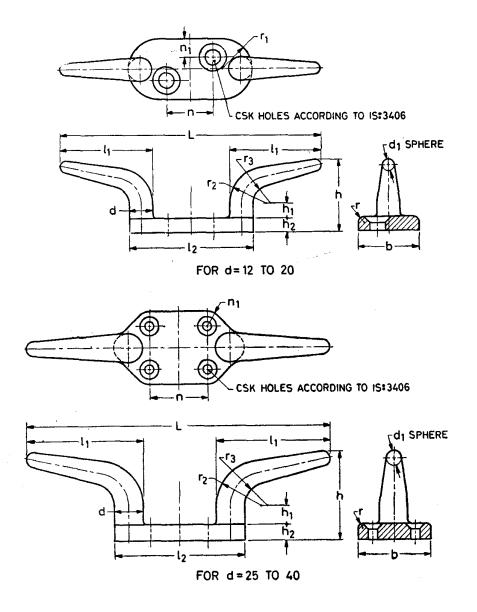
Double Horn Cleat — Bolted or Rived Type
